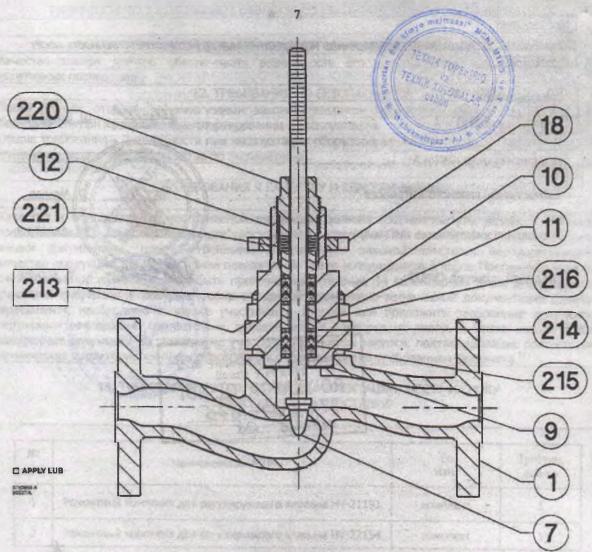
Design CP Control Valve Assembly (0.5 and 0.75 Inch)
